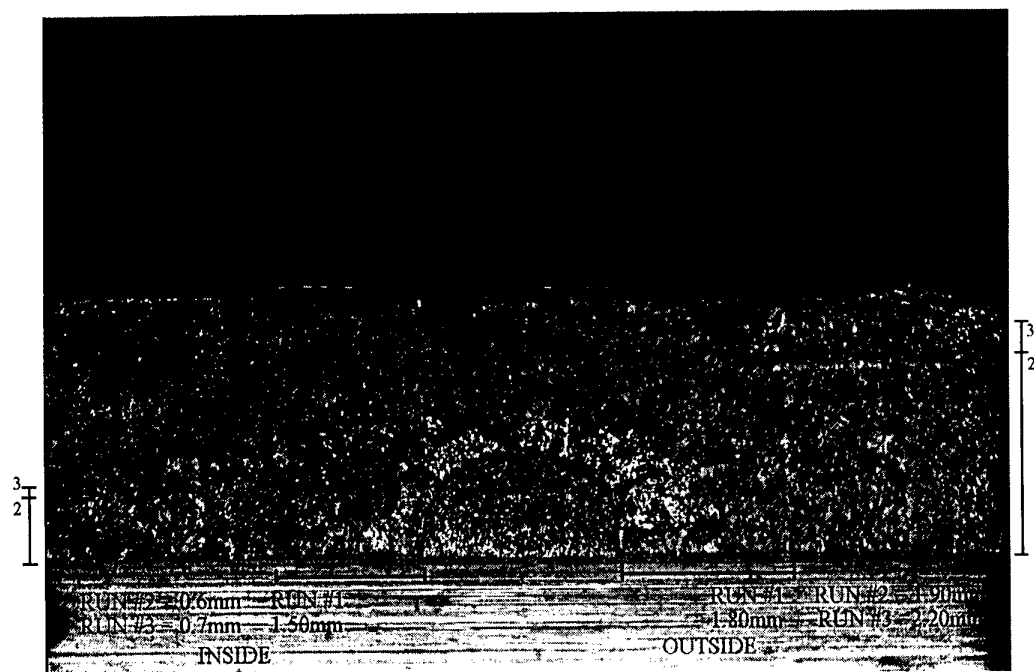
Fracture surface of Gear A2-2 with corresponding results of the Magnetic Rubber Inspection
